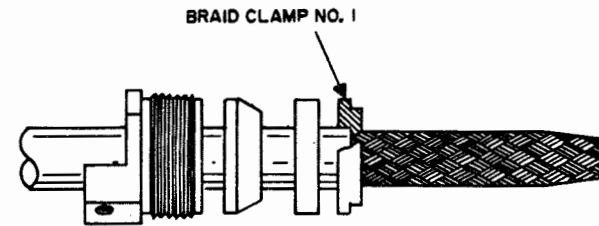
Assembly Instructions for Water-tight Connector Assembly P103.
